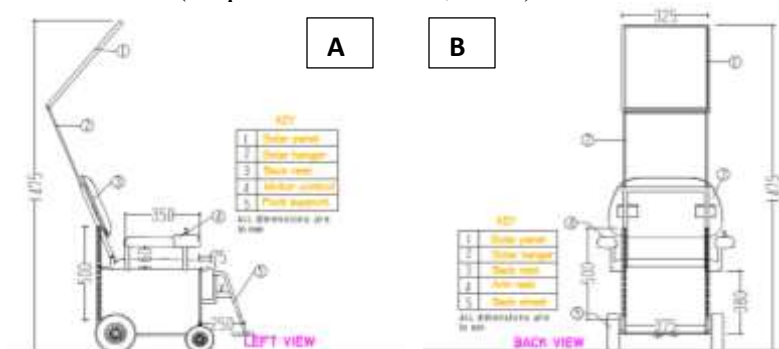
(a) Left Elevations of EDW, (b) Back Elevations of EDW
